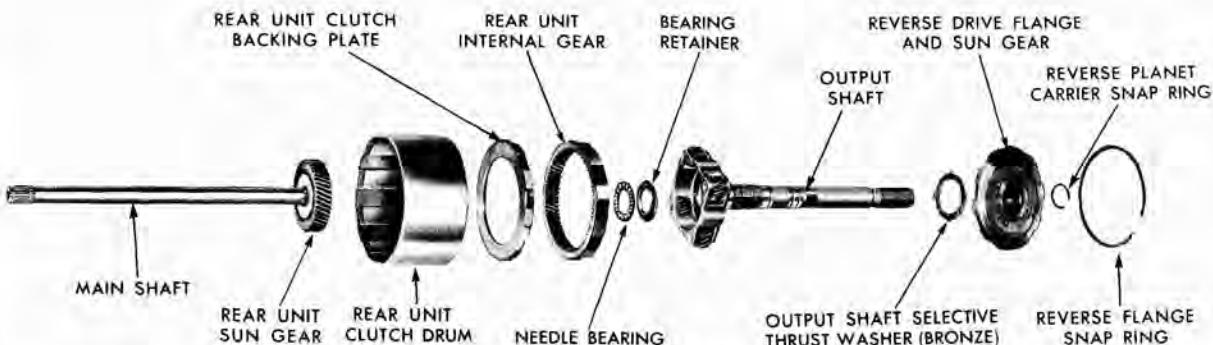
Rear Unit Drum, Mainshaft and Output Shaft Parts—Exploded
